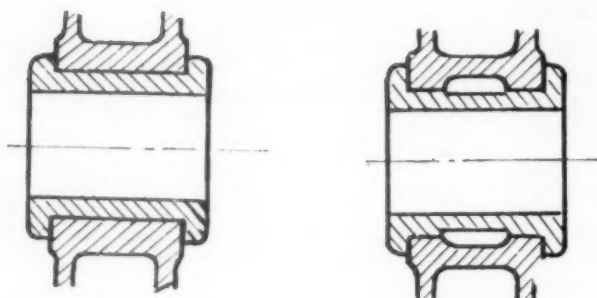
CORRECT (RIGHT) WAY TO REDUCE METAL SECTION IN PREFERENCE TO LEAVING HEAVIER SECTIONS (LEFT).
